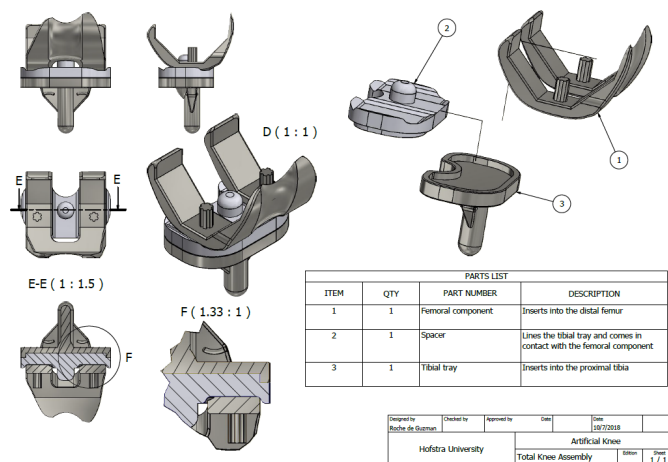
A 2D drawing sheet of the designed artificial knee assembly with representative base, projected, auxiliary, section, detailed, and exploded views, BOM parts list, and project information annotations.
